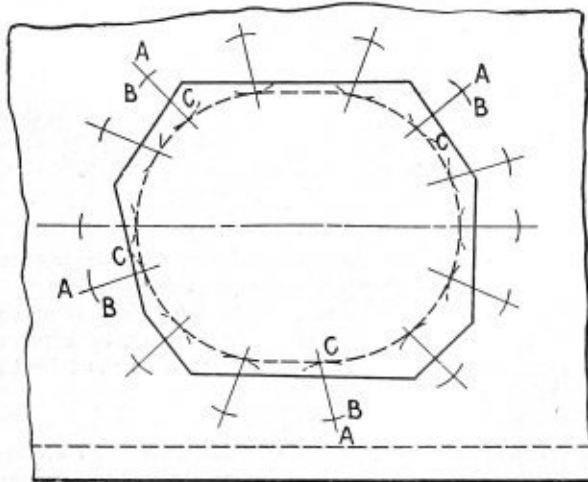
Method of Laying Out Patches for Welding
